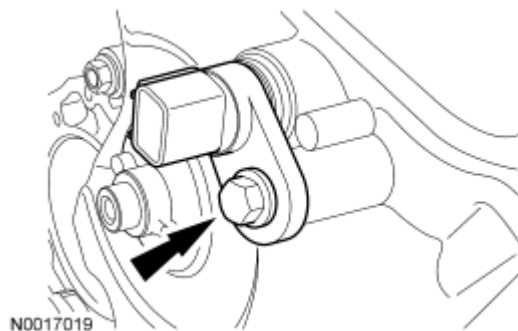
Locating Camshaft Position (CMP) Sensor And Bolt
